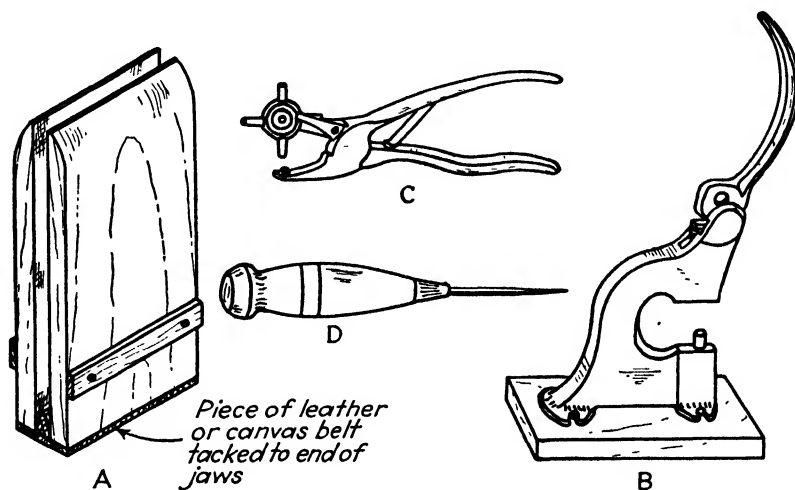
Leather-working tools: A, homemade leather-sewing clamp for use in a vise; B, hand machine for using tubular rivets; C, leather punch; D, sewing awl.
